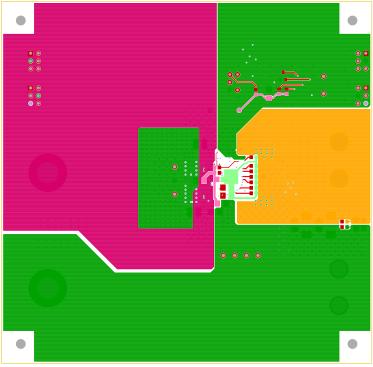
BOTTOM LAYER SOLDER SIDE
